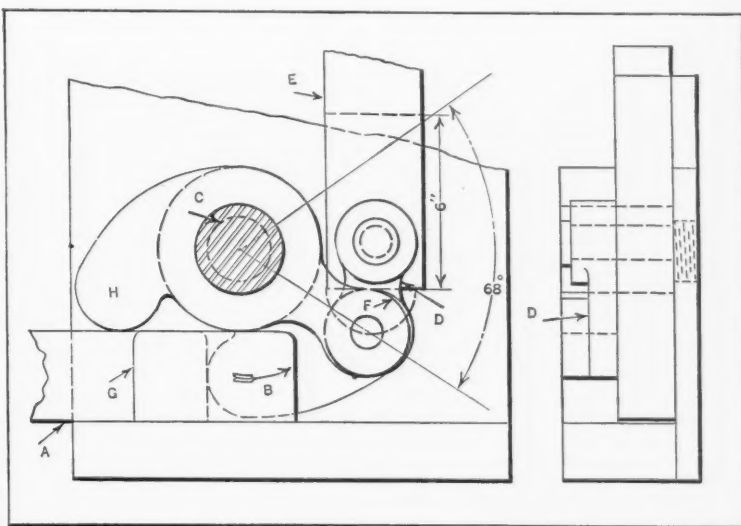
Cam Mechanism with Tool-slide at Right Angles to Push-bar
